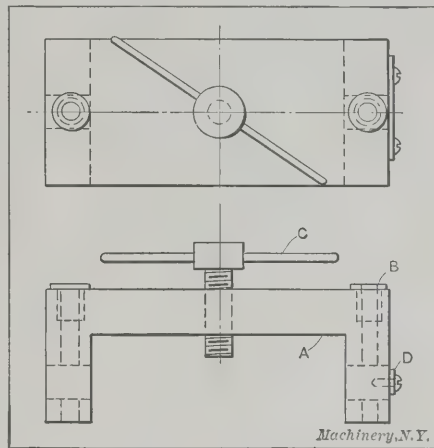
Simple Form of Jig for Drilling Two Holes in Shaft Ends
